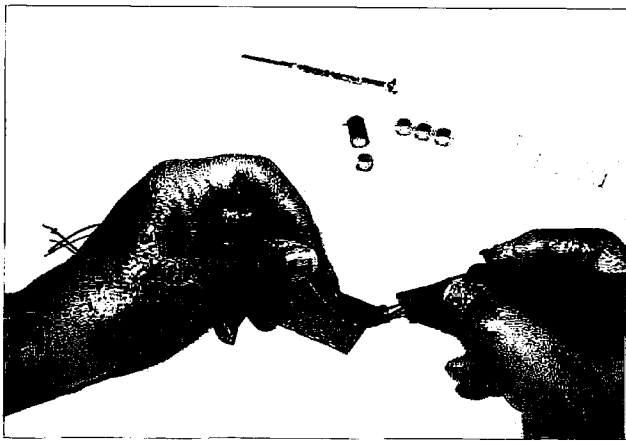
Photo A. Soldering the SMD component into the PC wiring with a battery iron.
